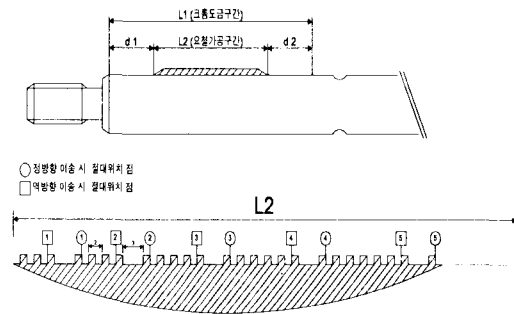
Section of piston rod and datum points for detecting absolute position
